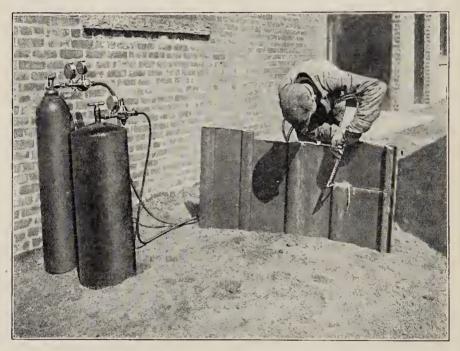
Cutting an iron plate into pieces by the oxyacetylene blowpipe
